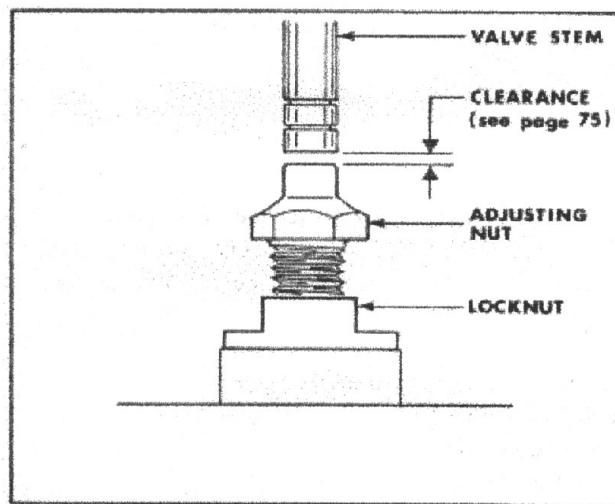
ADJUSTING VALVE CLEARANCE
